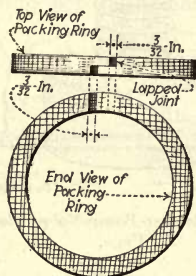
Ring of Tuck Canvas Piston-Packing.
